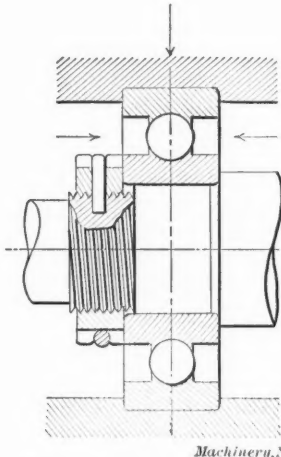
Radially Loaded Bearing held against Longitudinal Motion.
